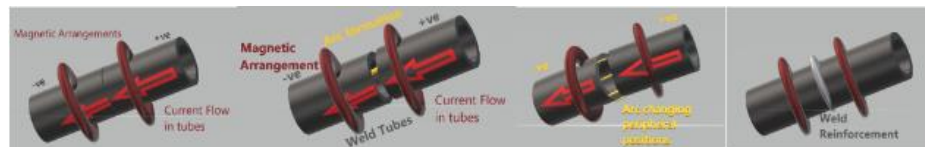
Arc impelling mechanism in MIAB welding
